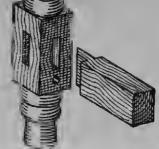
Enlarged Detail Section of Corner Washstand at A (Fig. 676).
